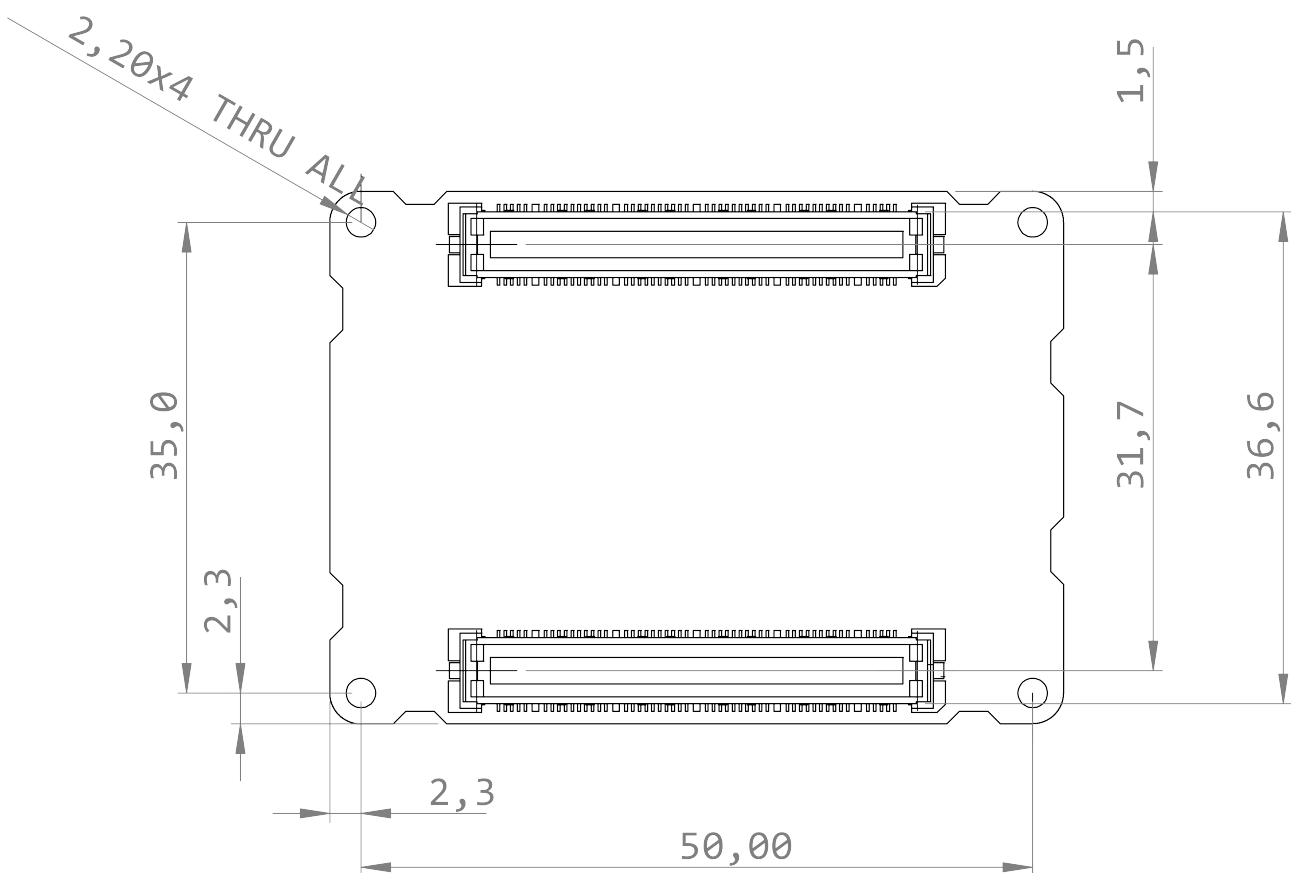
Bottom mechanical drawing of the XIPHOS X1/X2/X3/X4
